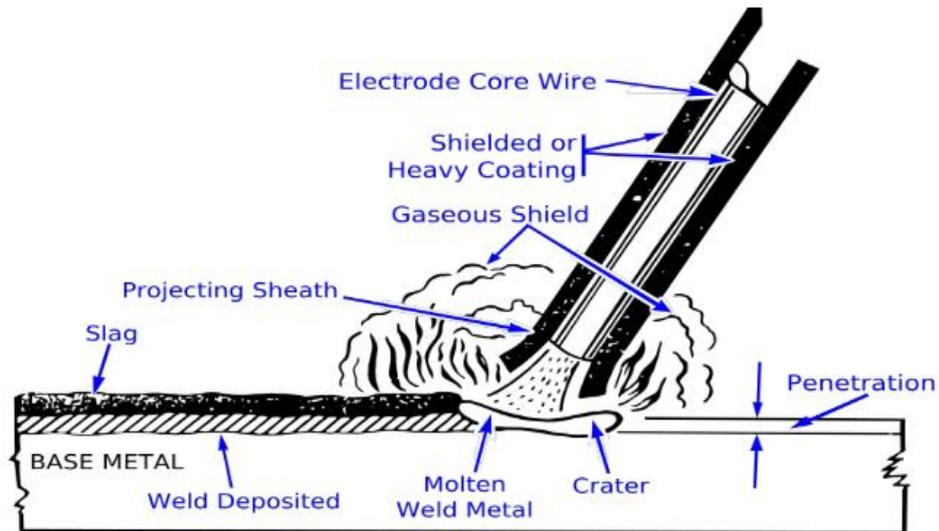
Typical SMAW welding in progress [5]
